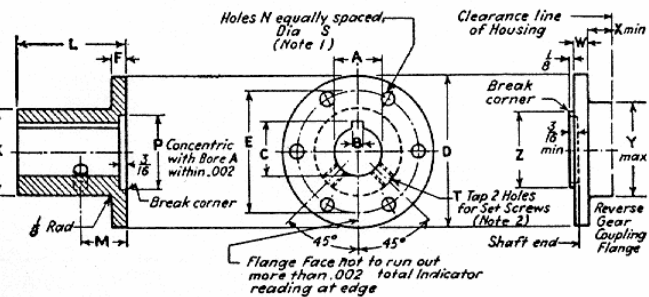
TYPE I PROPELLER-SHAFT COUPLING, INTERNAL PILOT, STRAIGHT BORE
